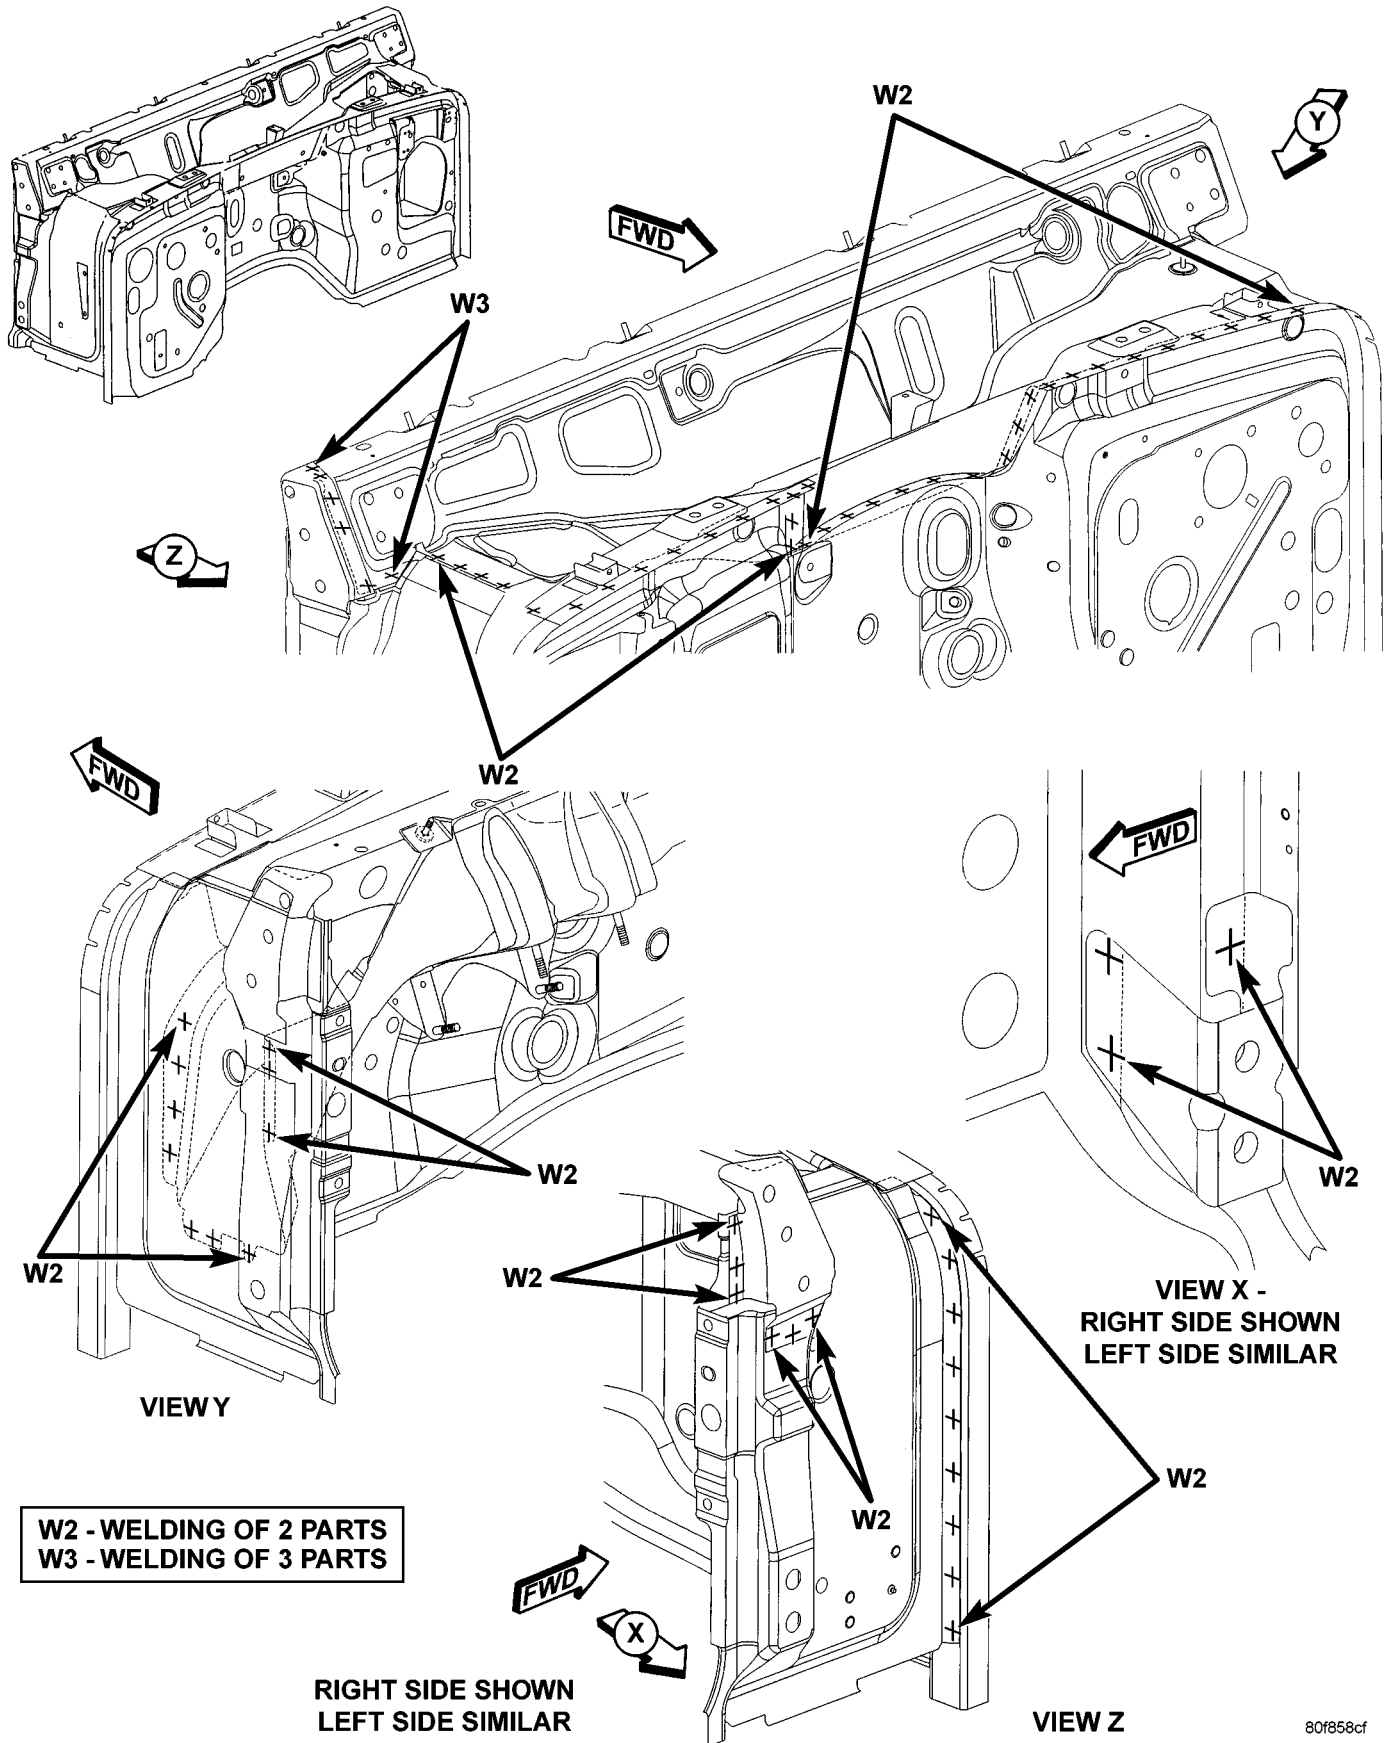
DASH COWL ASSEMBLY - LEFT HAND DRIVE
